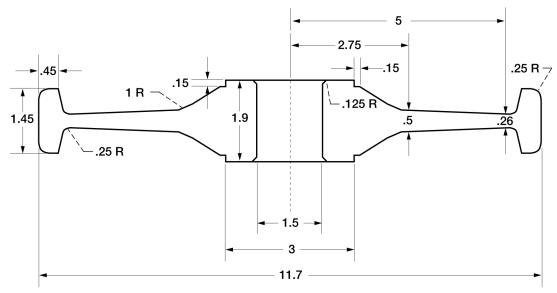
Machining plan for spin disk. All dimensions are in inches.
